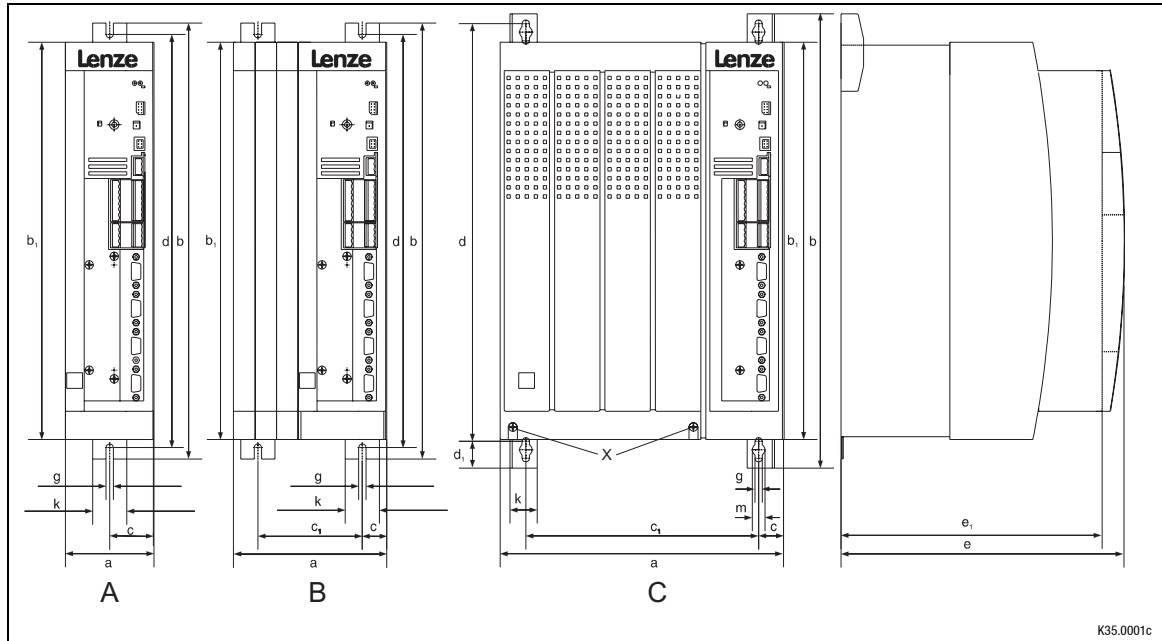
Dimensions for assembly with fixing rails/fixing brackets
